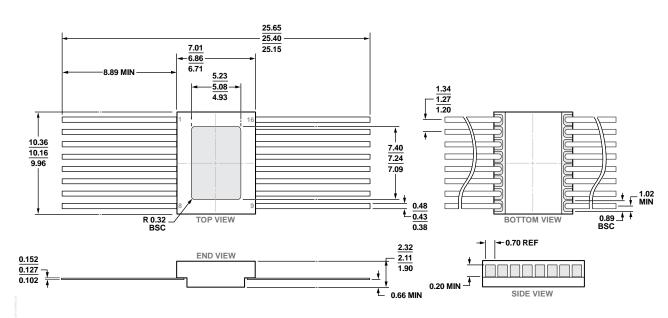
16-Lead Ceramic Flat Package [FLATPACK] (F-16-1) Dimensions shown in millimeters
